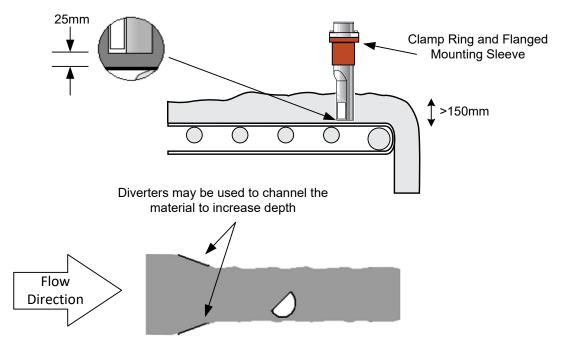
Mounting the Hydro-Probe on a Conveyor Belt
